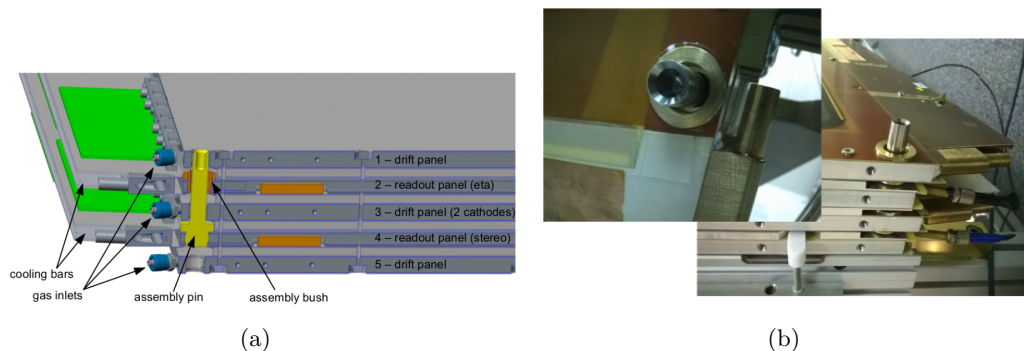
(a) Design of a NSW Micromegas quadruplet consisting of three drift panels and two readout panels. Dedicated pins and bushes are used to align the two readout panels perfectly during assembly; (b) Photo of an alignment pin.
